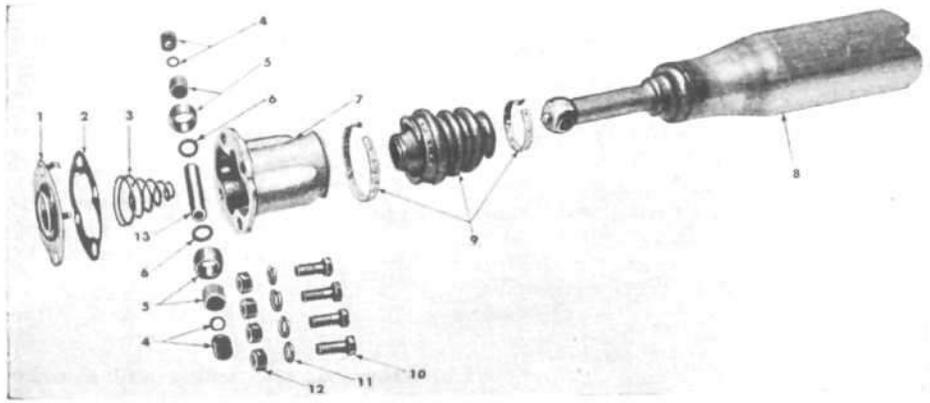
PROPELLER SHAFT AND UNIVERSAL JOINT—BALL AND TRUNNION TYPE
